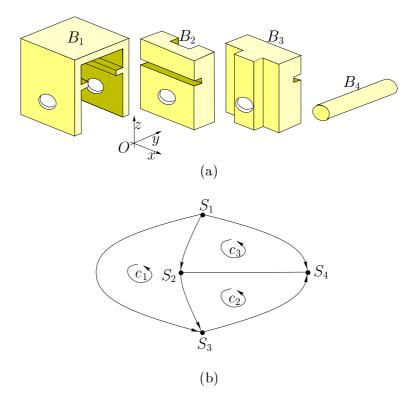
Four workpieces to be assembled (a), and the associated GR graph of the final assembly (b).
